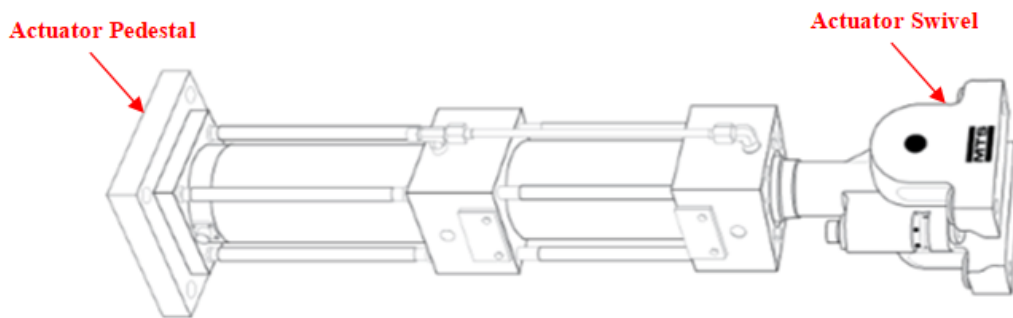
MTS Actuator Model 244.41 Drawing [39]
